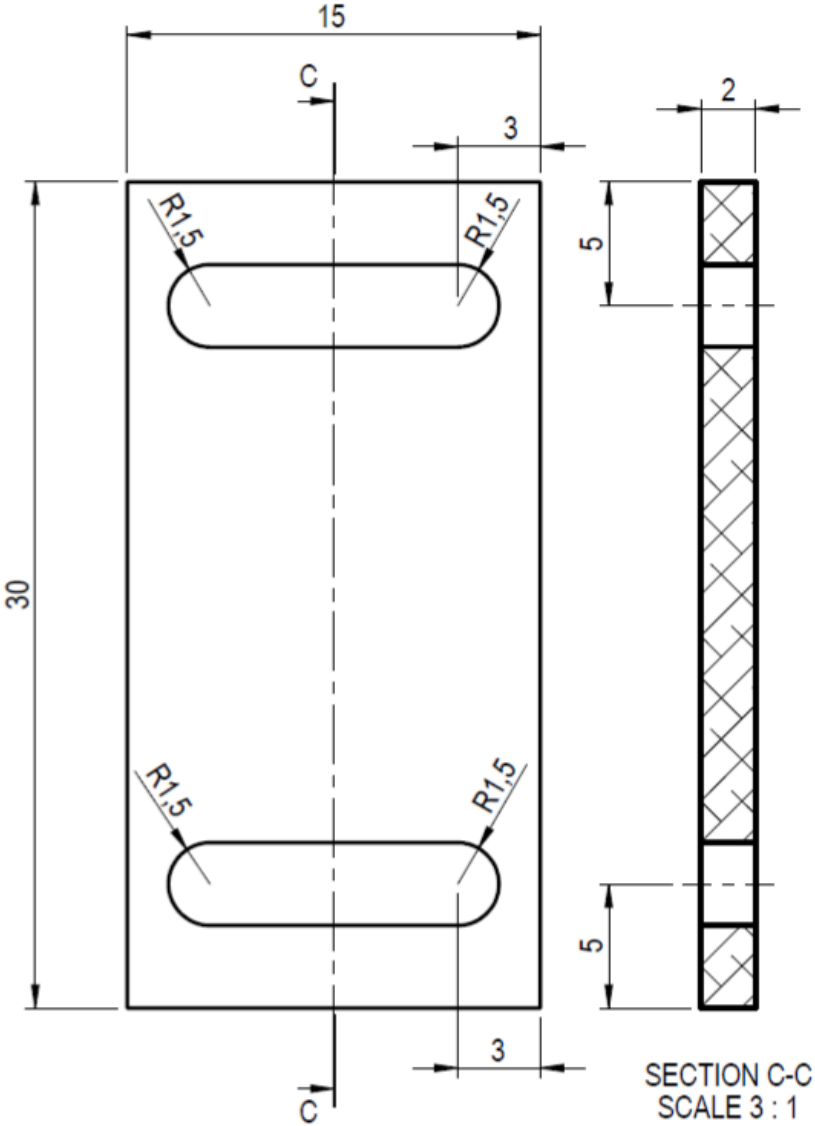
Technical drawing of Plate 4 (aluminum plate for guiding the feeding material)
